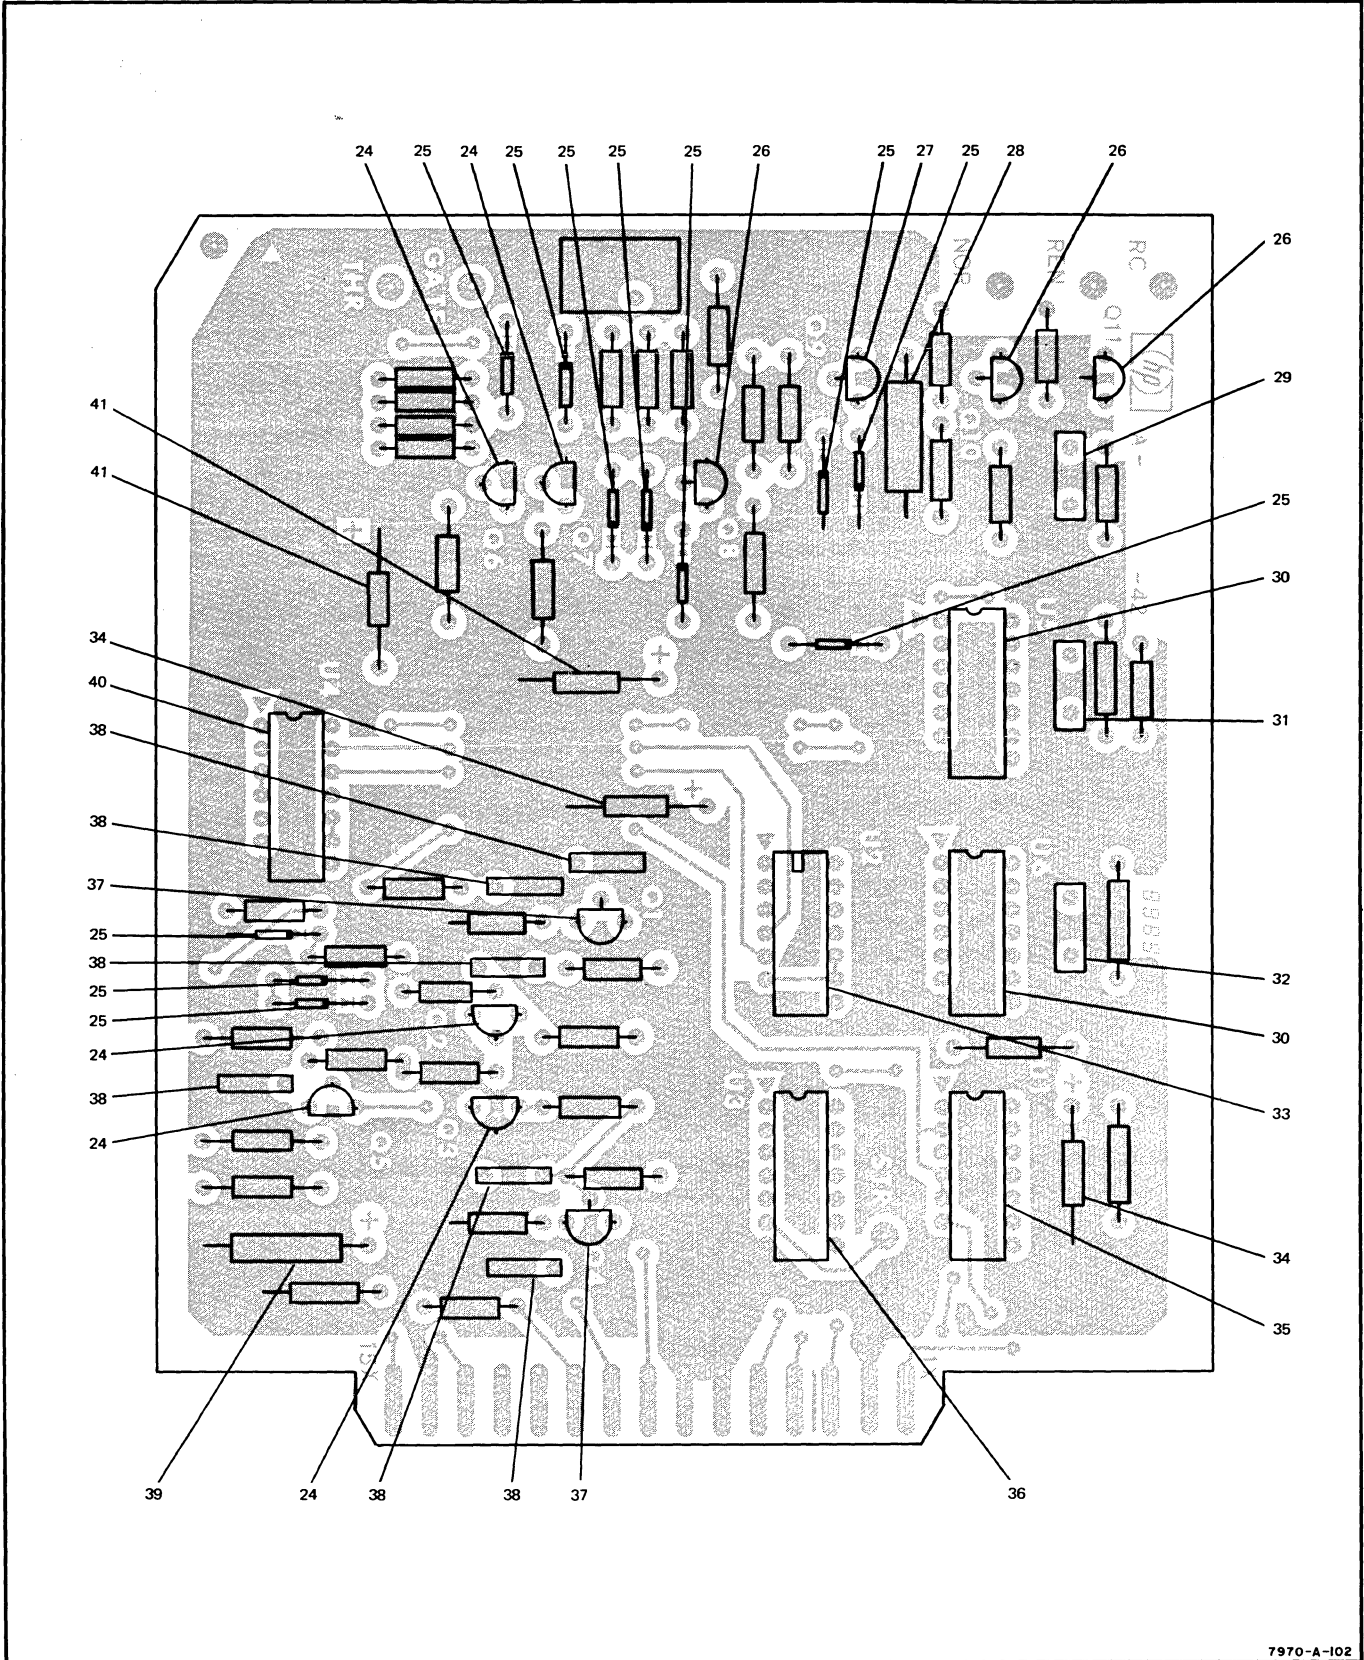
Read/Read Control PC Assembly A18A1 (Sheet 2 of 2)
